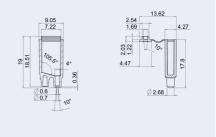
Detail drawing of tank Fluidic 926 with Mini Luer interfaces for easy on-chip fitting
